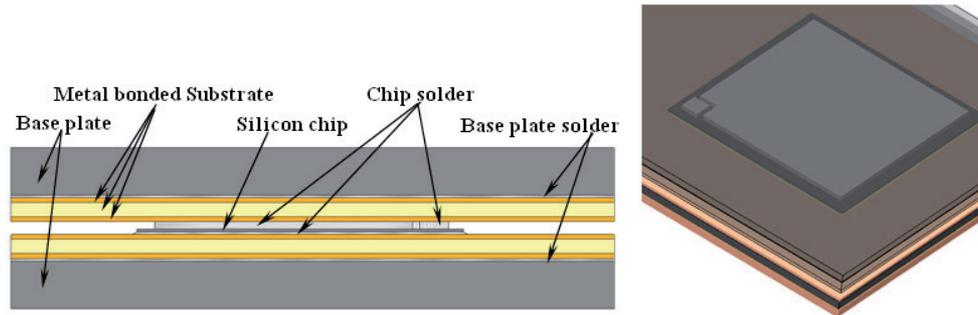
Direct Solder (DS) assembly (ABB 1200 V – 150 A chip).
